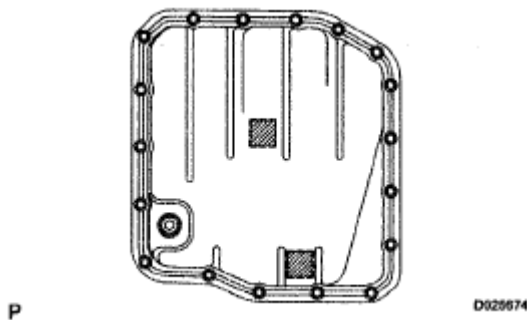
Identifying Seal Packing Or Equivalent To 18 Bolts
